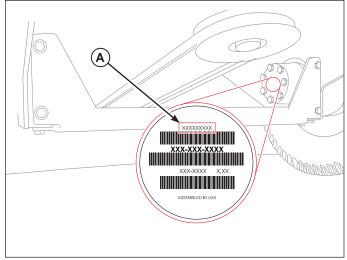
Locating the Wheel Motor Serial Number A. Wheel Motor Serial Number
